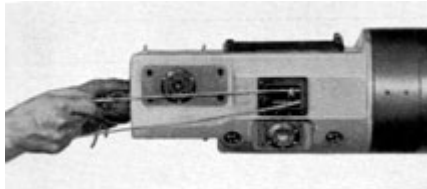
Special cord attached to shifting wire spindles and held with both hands.
